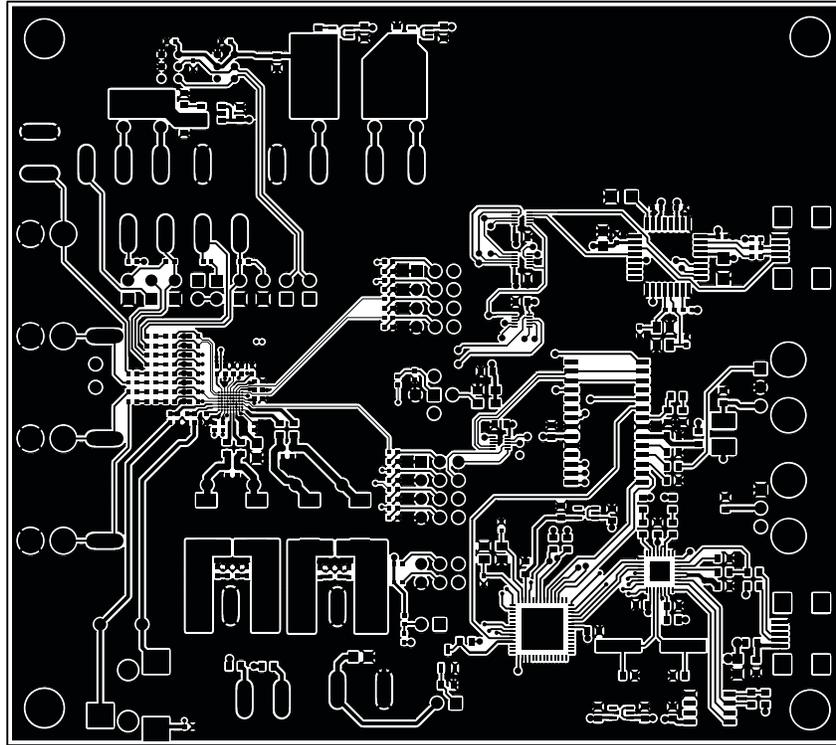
MAX9888 EV Kit PCB Layout—Component Side
